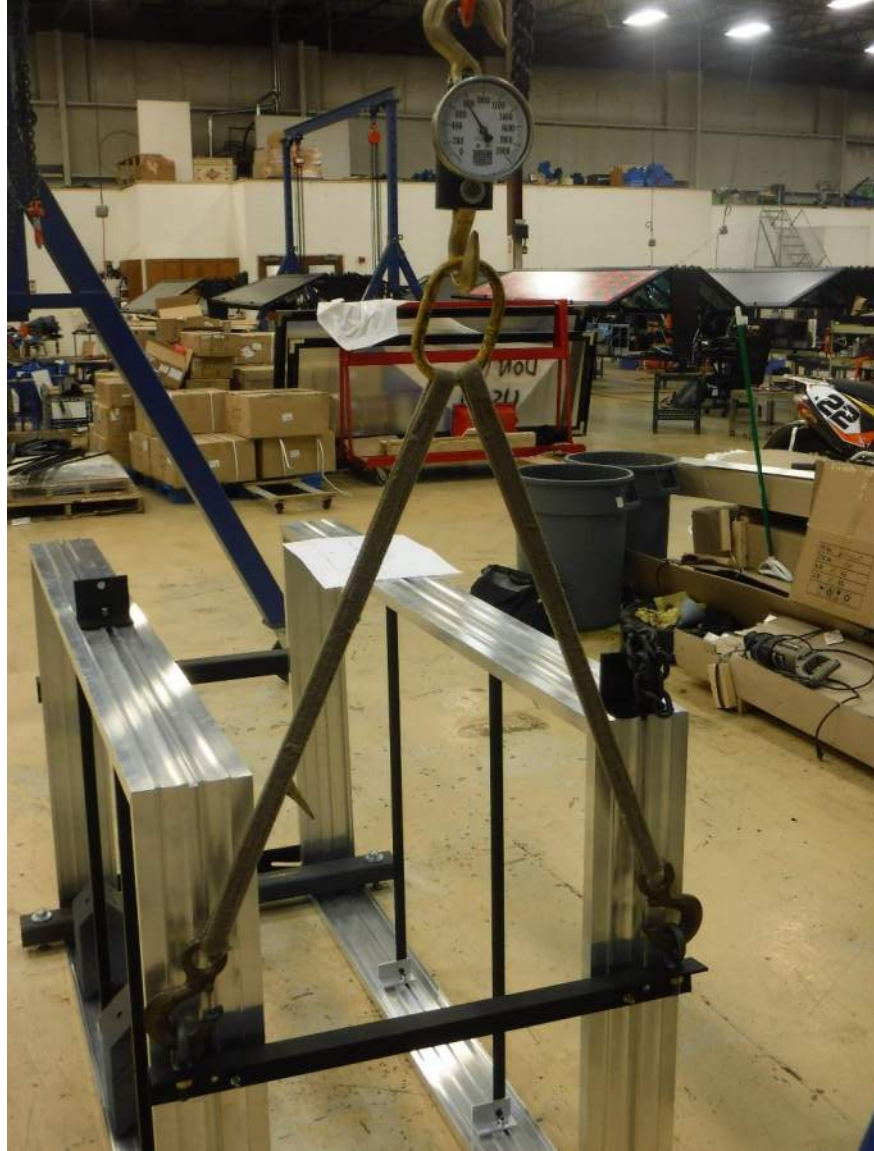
Test LT-3, Side Angle Test [800 LBS]
